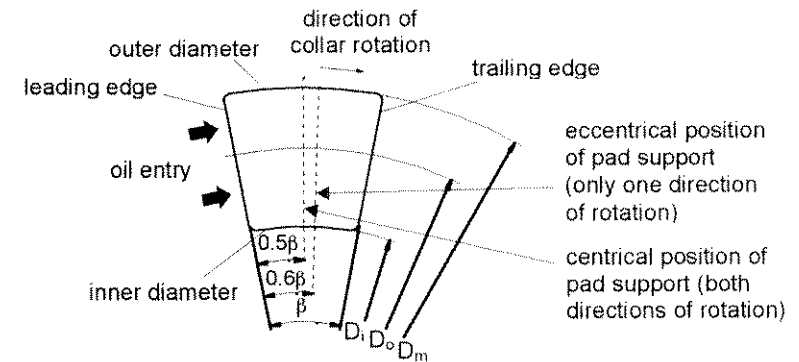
Schematic drawing of a segment of an axial tilting pad bearing
